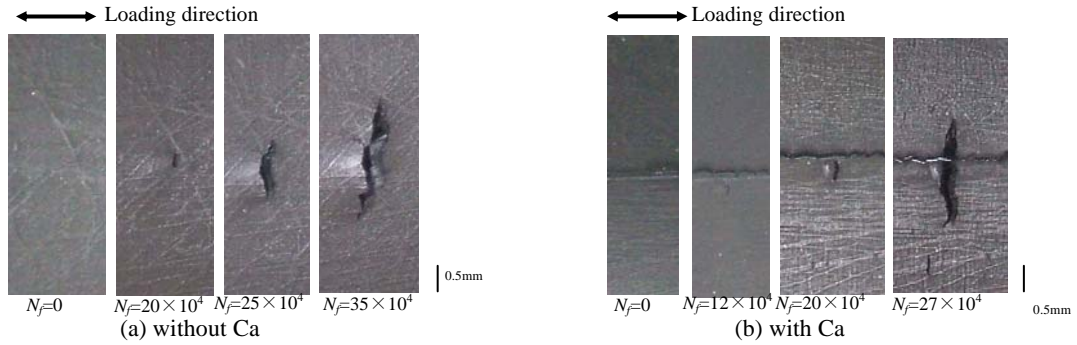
Fatigue crack of the with/without Ca specimens in test B.
